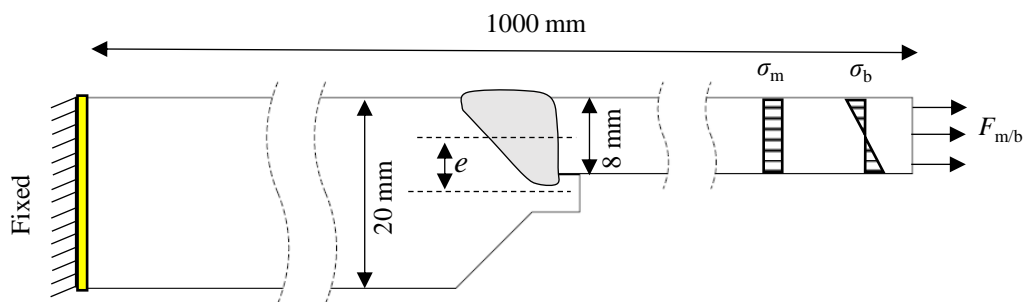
The second inspected weld detail between cast steel part and UHSS plate with dimensions, boundary conditions and loadings. Eccentricity, marked as e , of the joint causing secondary bending stress.
